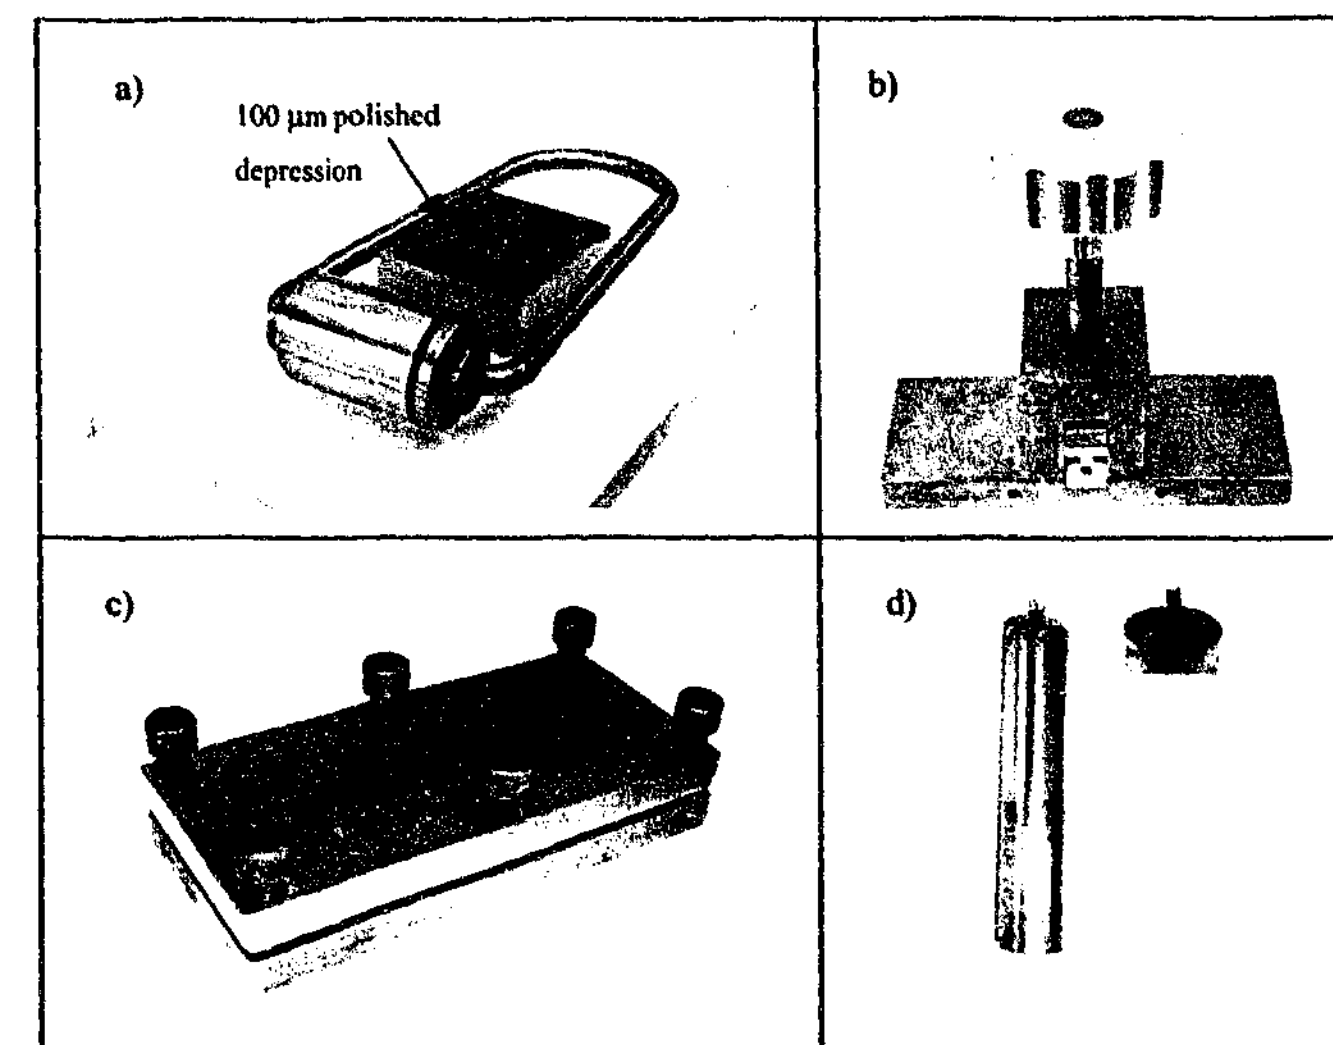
Apparatus used in the fabrication of the optical cells, a) roller and stainless steel block b) Teflon-lined press c) Teflon-lined clamp d) double edged tool-steel punch.
